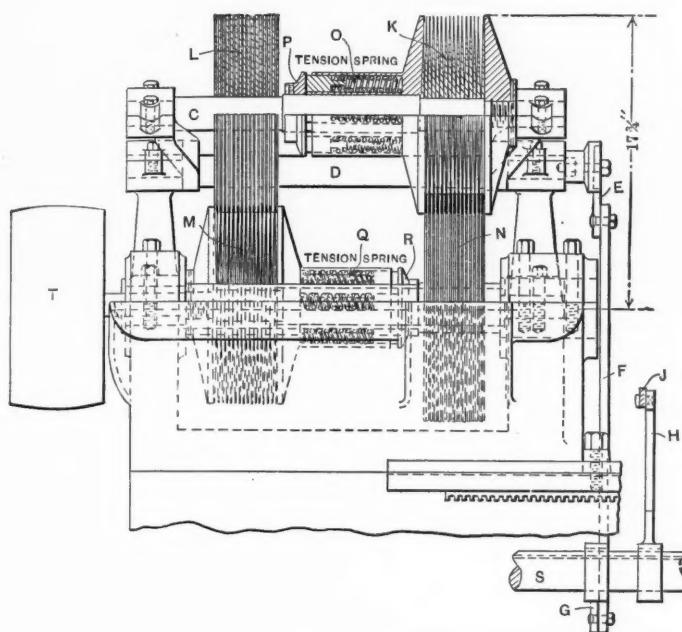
Suggested Arrangement of Dill Drive as Incorporated in the Head-stock of a 20-inch Lathe.
